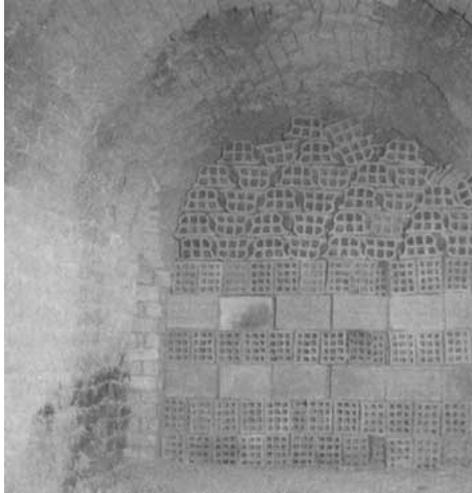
Blocks in small Hoffmann kiln (Madagascar)
